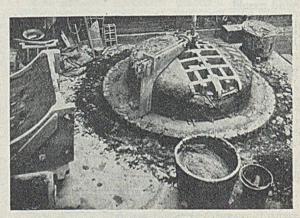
Dome Part of Main Core showing the Vapour Outlet Part built into position.
